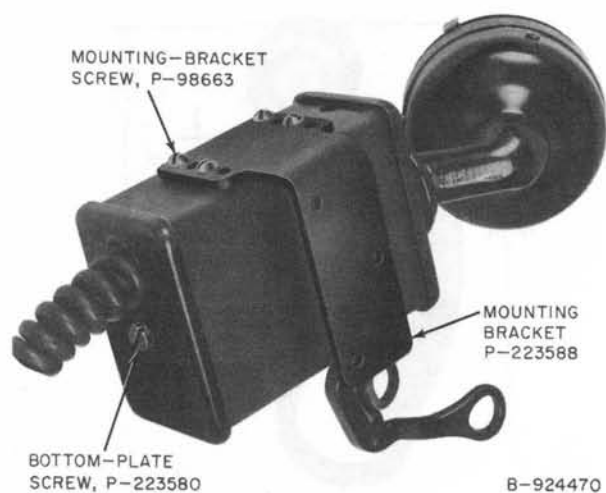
Assembly of C-Type Handset Mounting and Bracket
